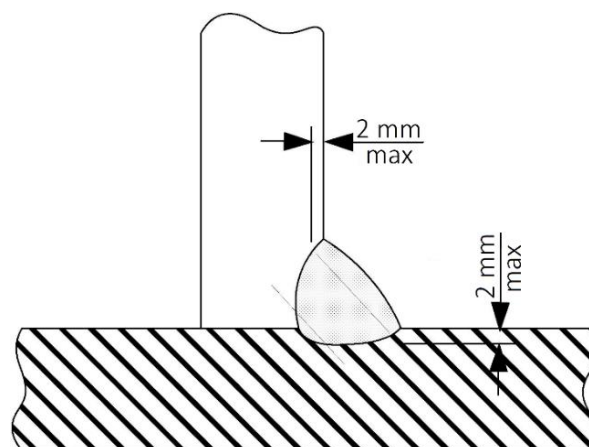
Example of hardness test with row indentation in fillet welds
